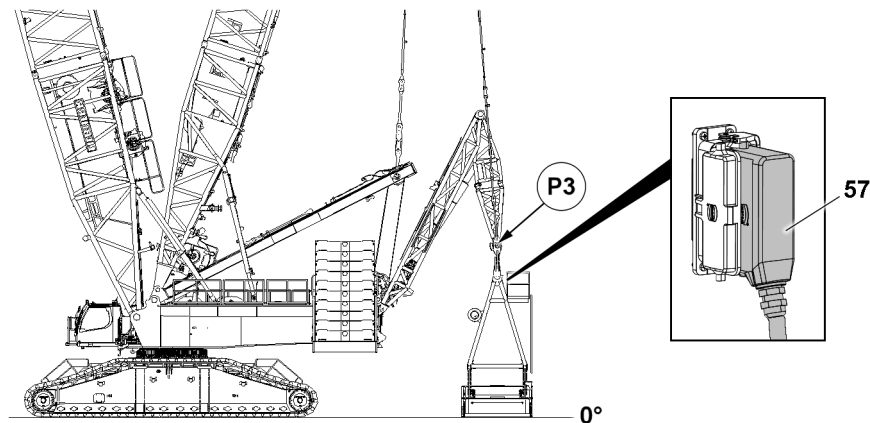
Establishing the electrical connection from the suspended ballast to the suspended ballast guide
